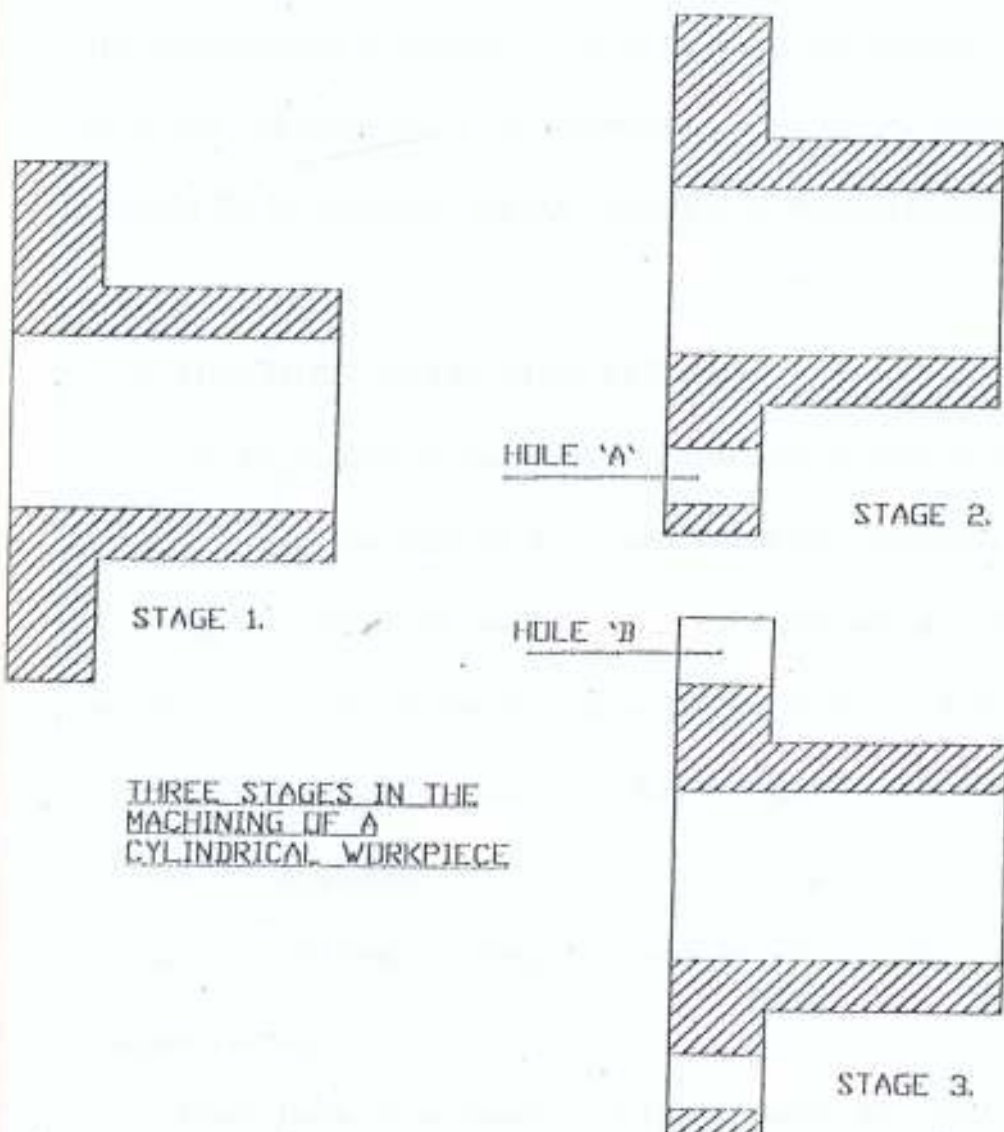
(B) Three Stages in the Machining of a Cylindrical Workpiece
